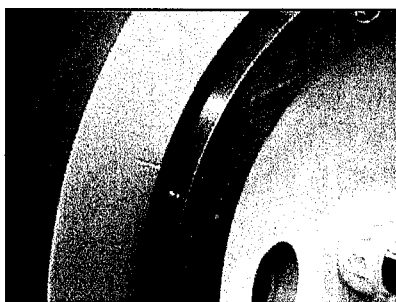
Match-Mark Alignment of Damper Assembly and Aft Adapter
